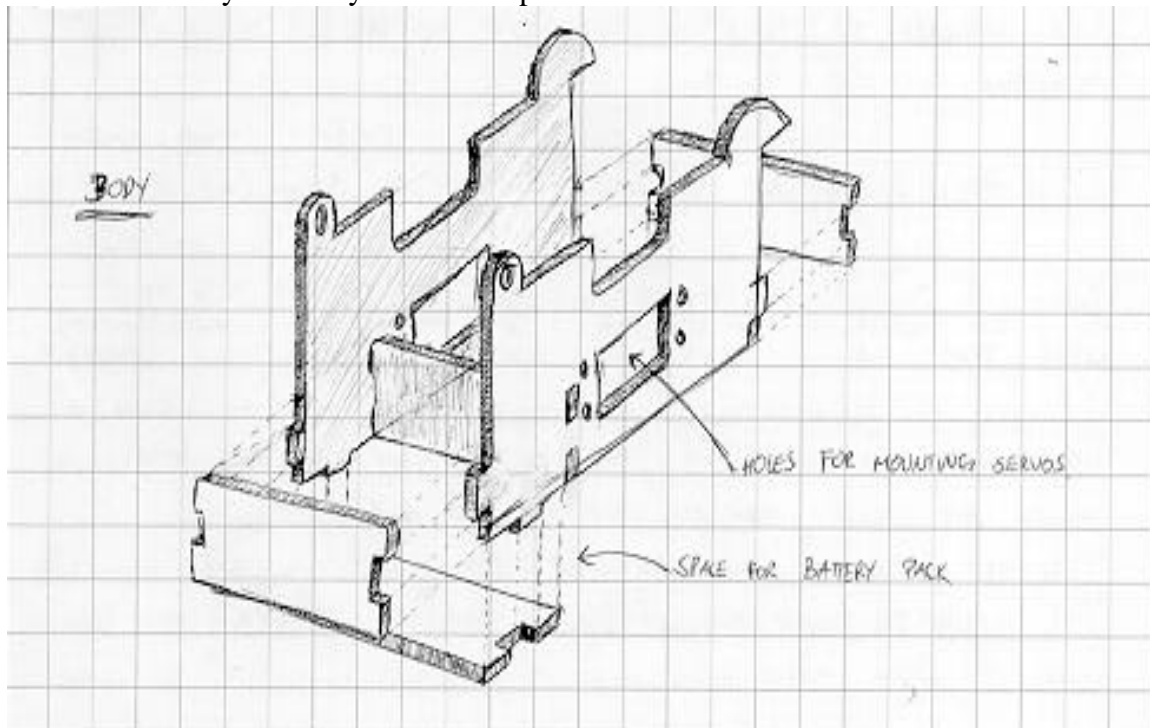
Sketch of TJ-PRO™ frame assembly showing how the four planks join the sides. (Drawing courtesy of Ivan Zapata).
